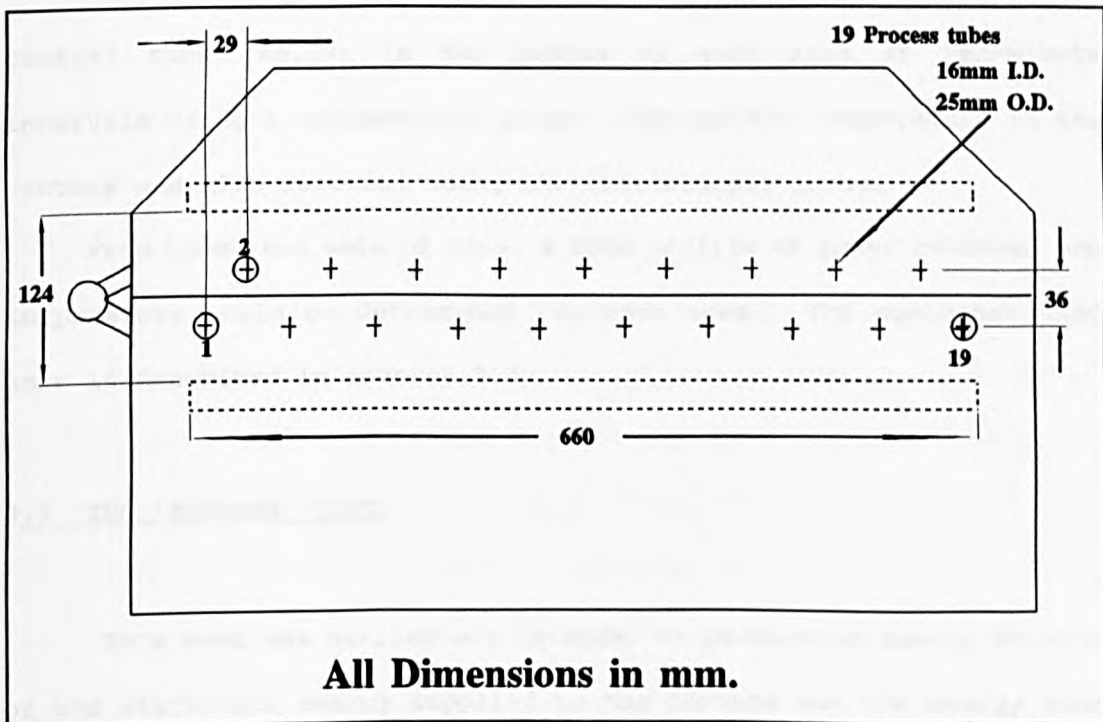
Front view of furnace no. 4 at Critchley's, giving dimensions.
